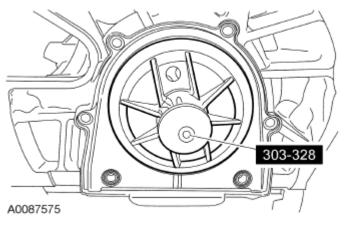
Identifying Crankshaft Rear Main Oil Seal Installer (303-528) Courtesy of FORD MOTOR CO.
